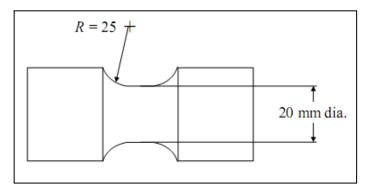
Tension Test Specimen Machined from Transverse or Flexure Test Bars for Gray Cast Iron
